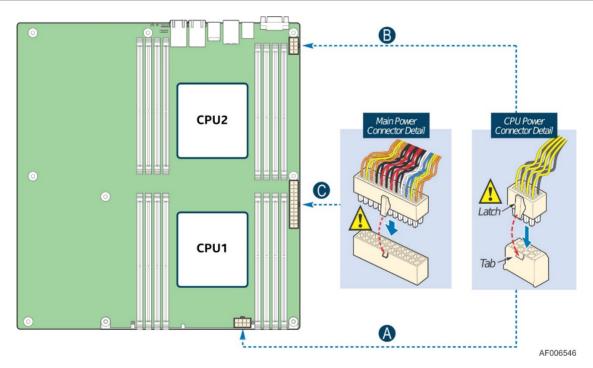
Connecting Power Cables - S2600CW Server Board Family
